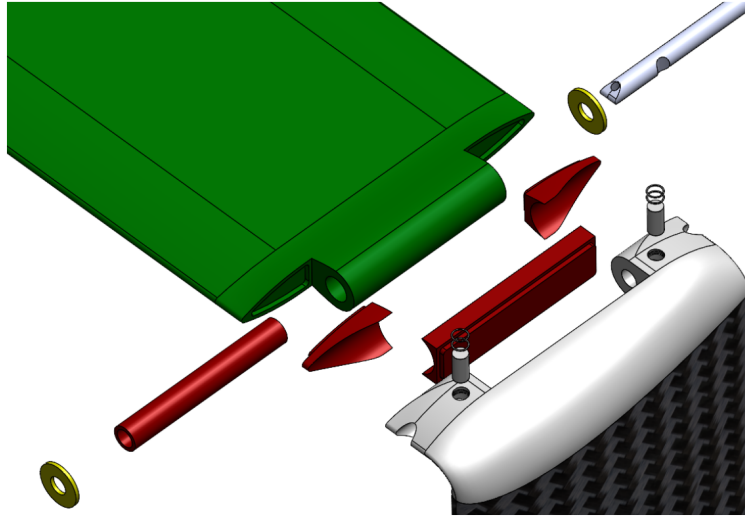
A exploded drawing of the full strut/hinge/foil assembly. The assembly is considerably more complicated than the 1st generation system, but has been redesigned to address several sources of losses and points of failure identified following the deployment of the 1st generation system.
